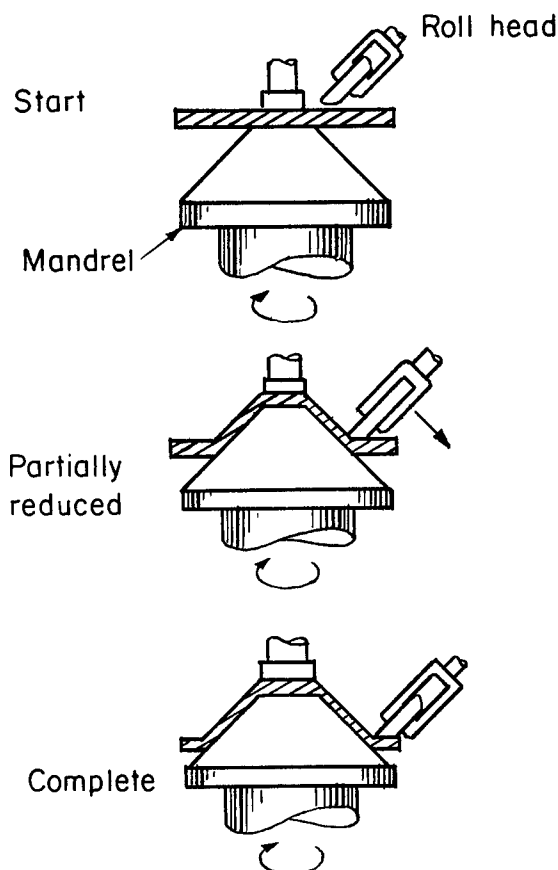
Setup for shear forming a conical shape from a flat blank (ref. 107).
